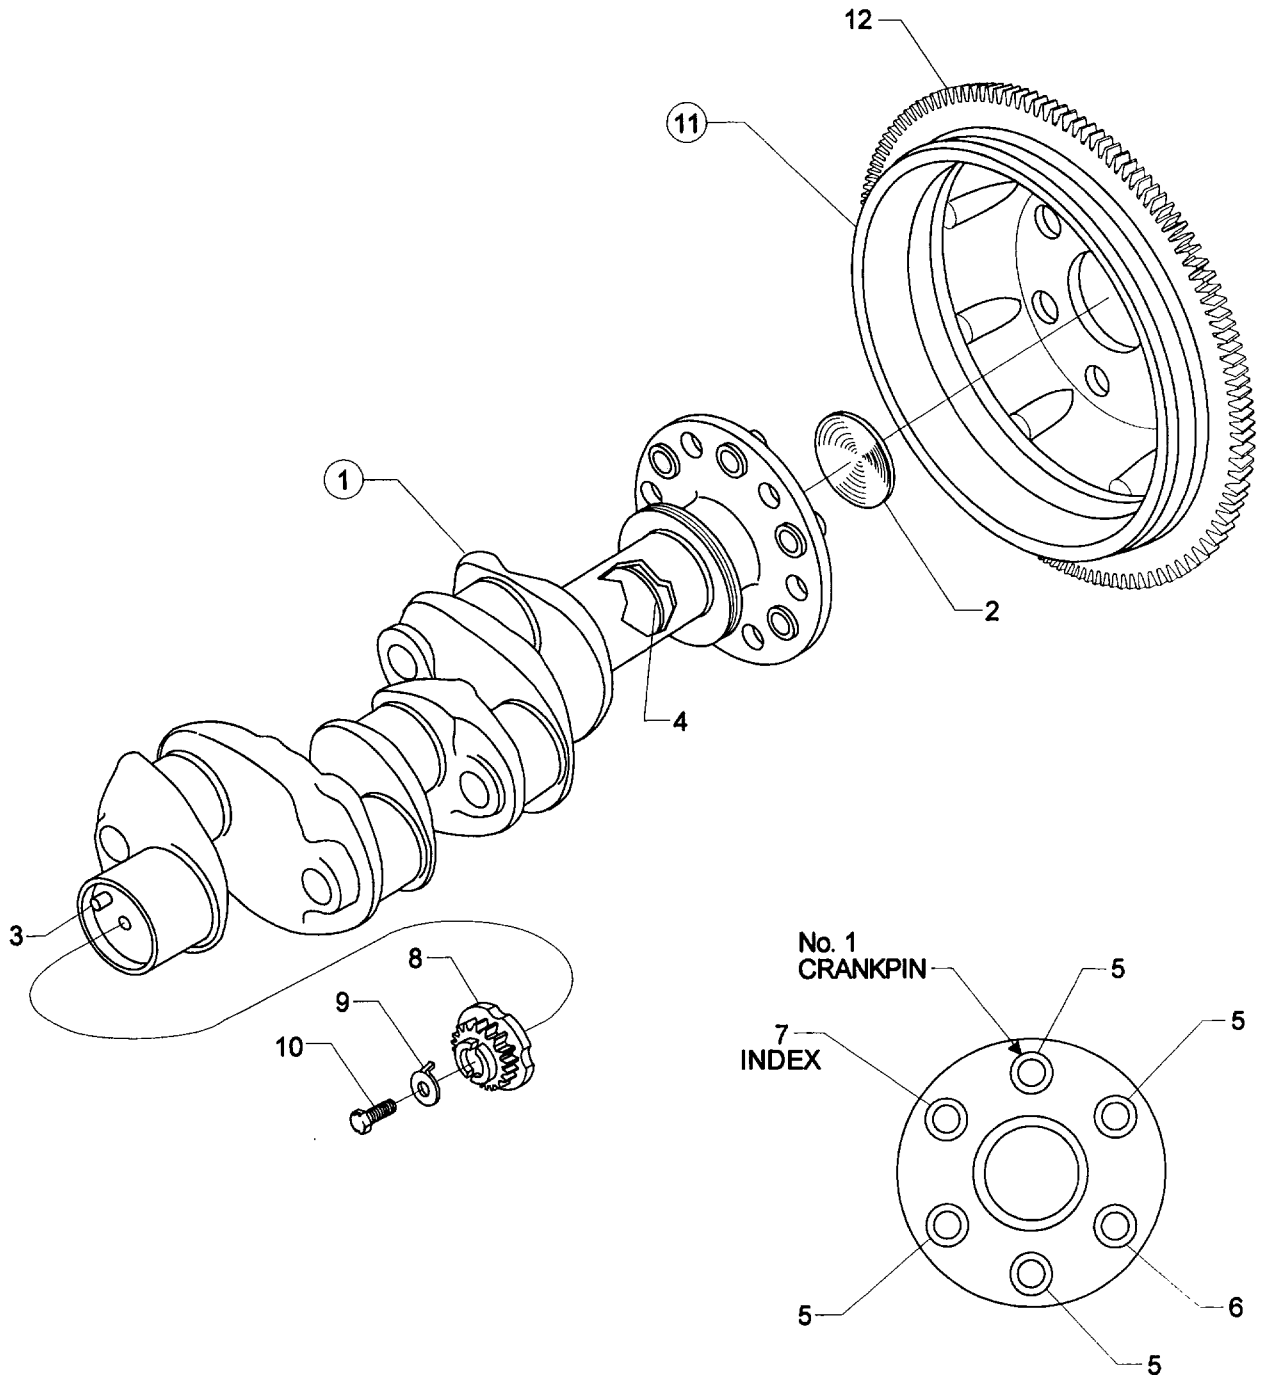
CRANKSHAFT ASSEMBLY AND RELATED PARTS
